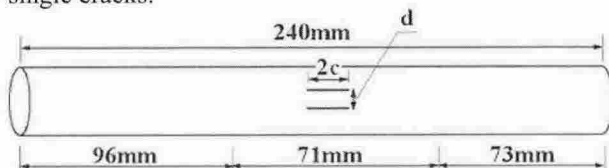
Geometry of tested tube containing two parallel through-wall cracks
